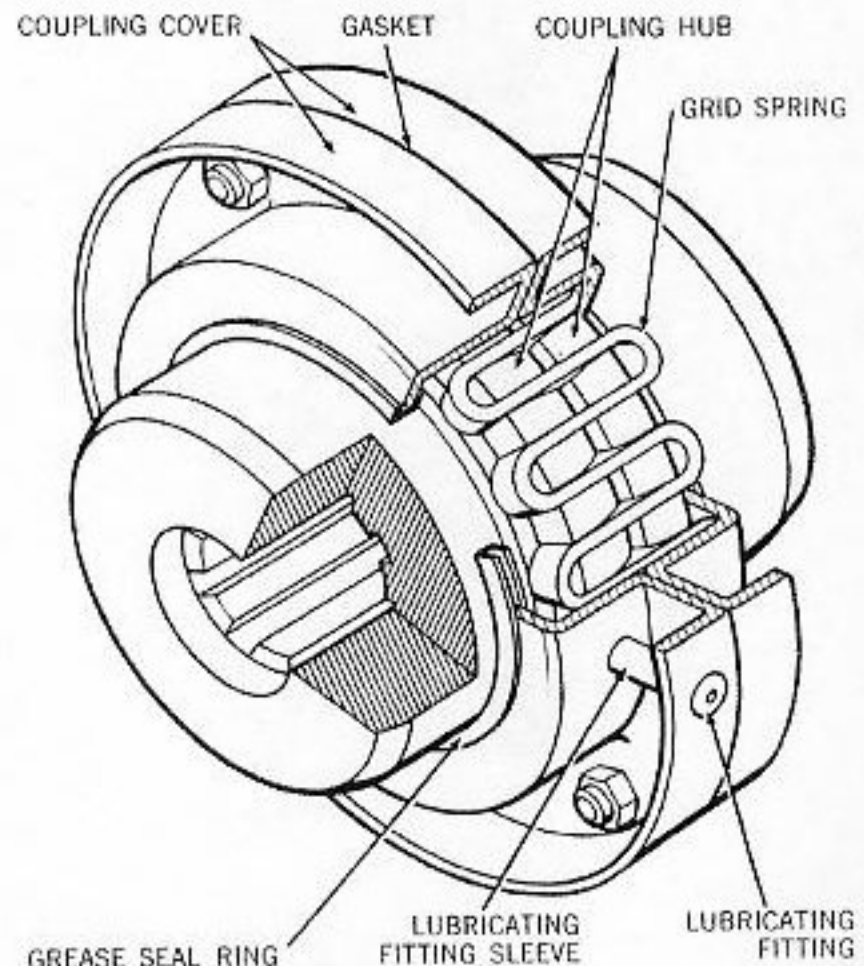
Projectile Ring Drive, Motor to Auxiliary Pump Coupling, Cutaway View
